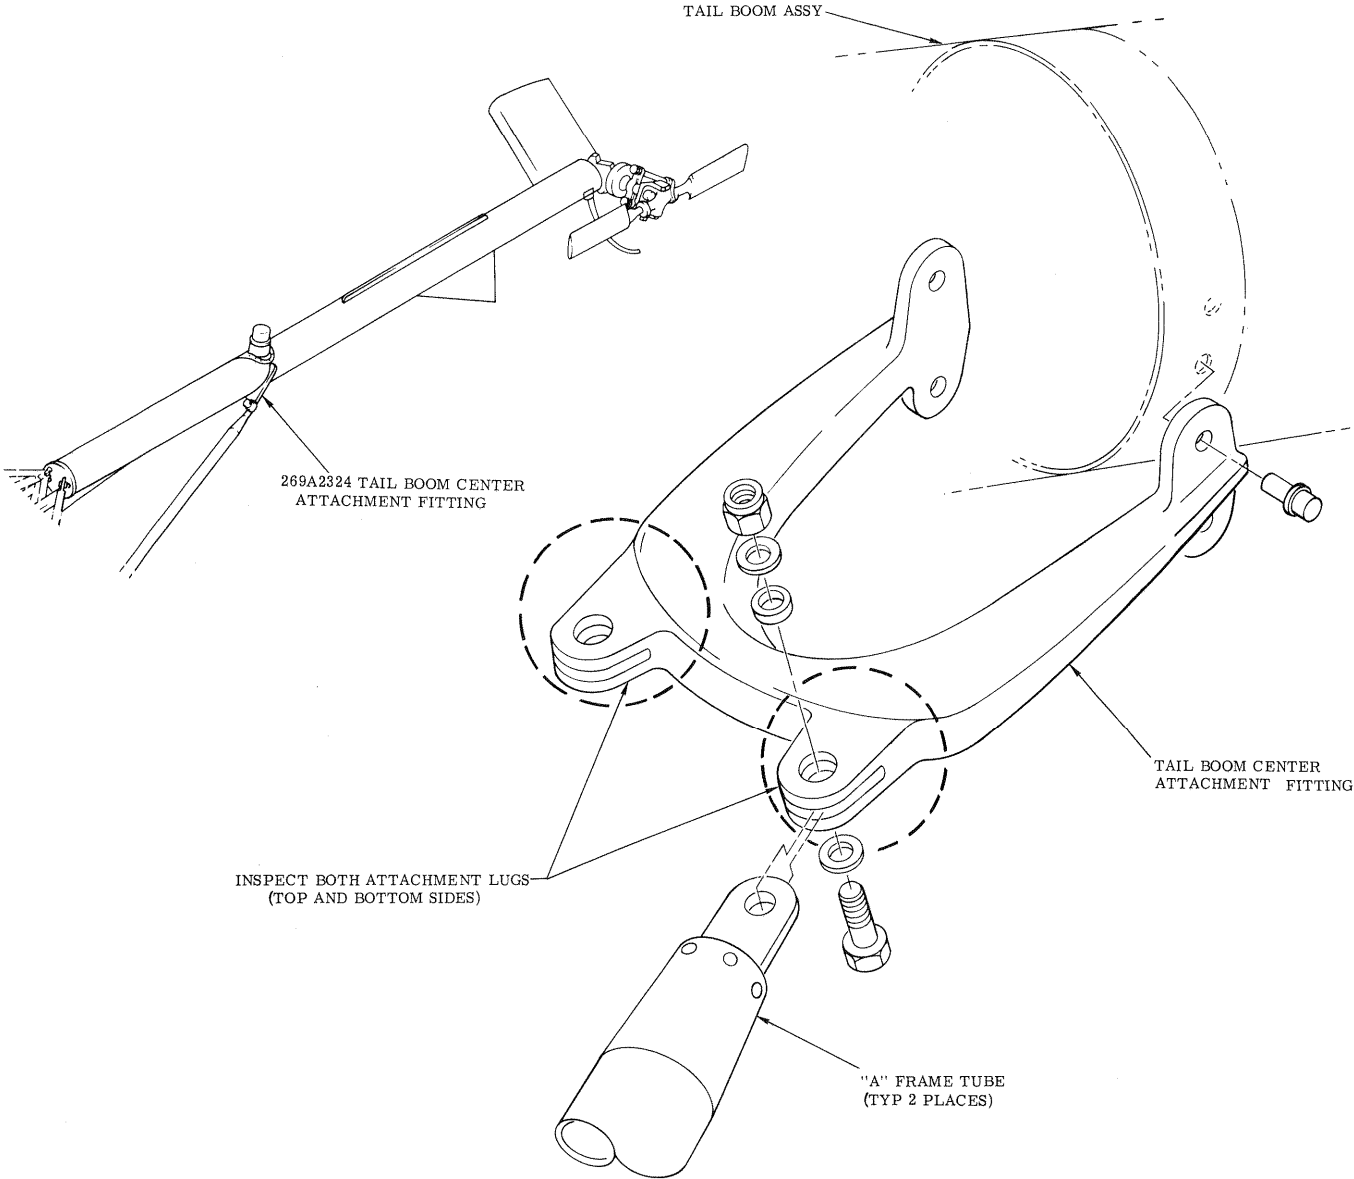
INSPECTION - TAIL BOOM CENTER ATTACHMENT FITTING
